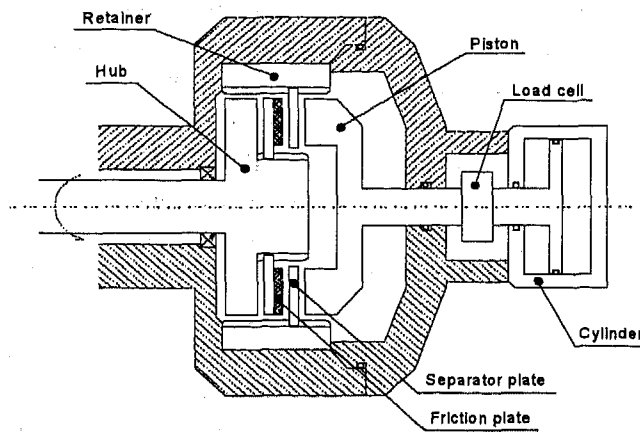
Test Piece Fixture of a Modified SAE No. 2 Friction Testing Machine
